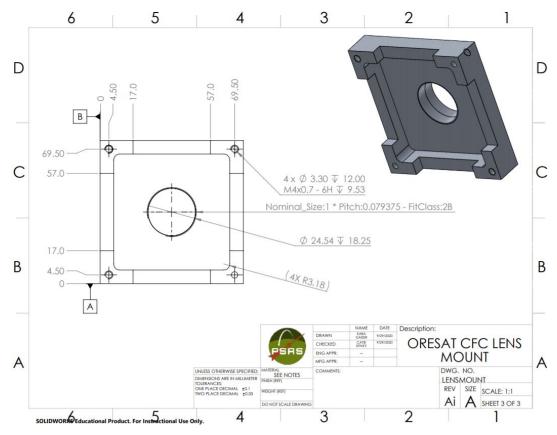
2 of 2 Dimensioned Drawing of the OreSat CFC Mount
